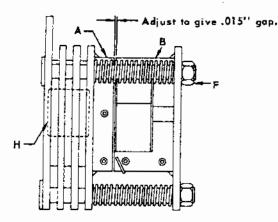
MOTOR BRAKE ADJUSTMENT
